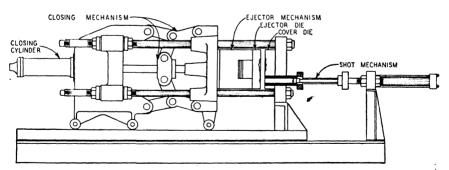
Principal components of a cold-chamber machine for die casting of aluminum, magnesium, and copper-base alloys.
